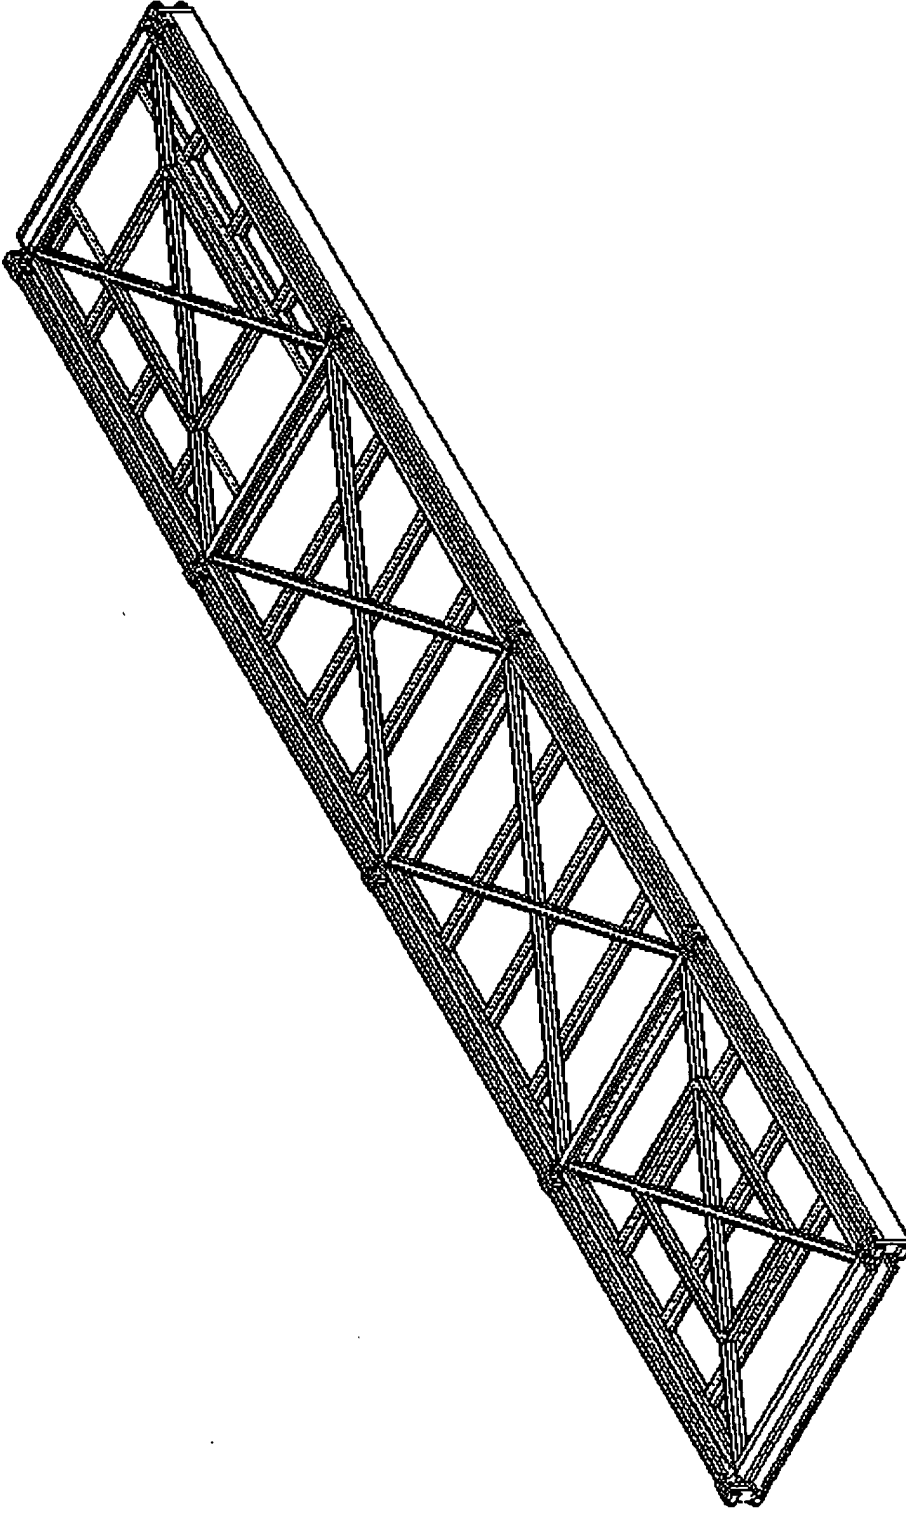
A: Isometric view of a floor frame that contains a front frame and a back frame (40 foot collapsible cargo container)
